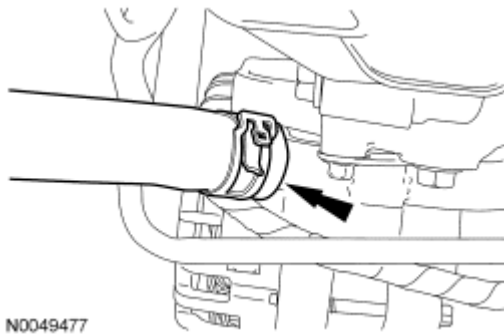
Disconnecting Coolant Hose From Coolant Tube Assembly
